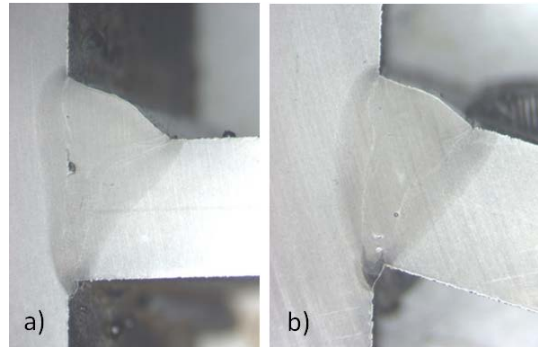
Cross cuts for weld experiments for T-joints with a) I- and b) V-gap
